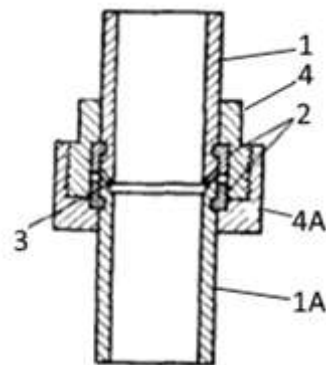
Vacuum pipe connection: 1 and 1A – pipes;
